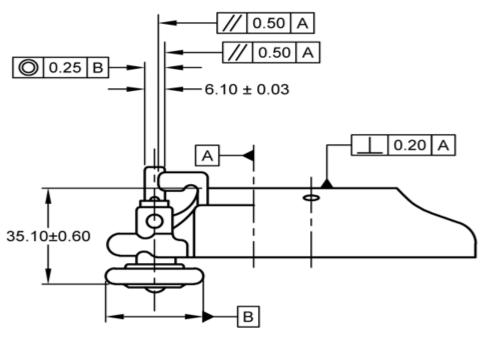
NOMENCLATURE FOR BOBBIN WINDER ASSEMBLY
